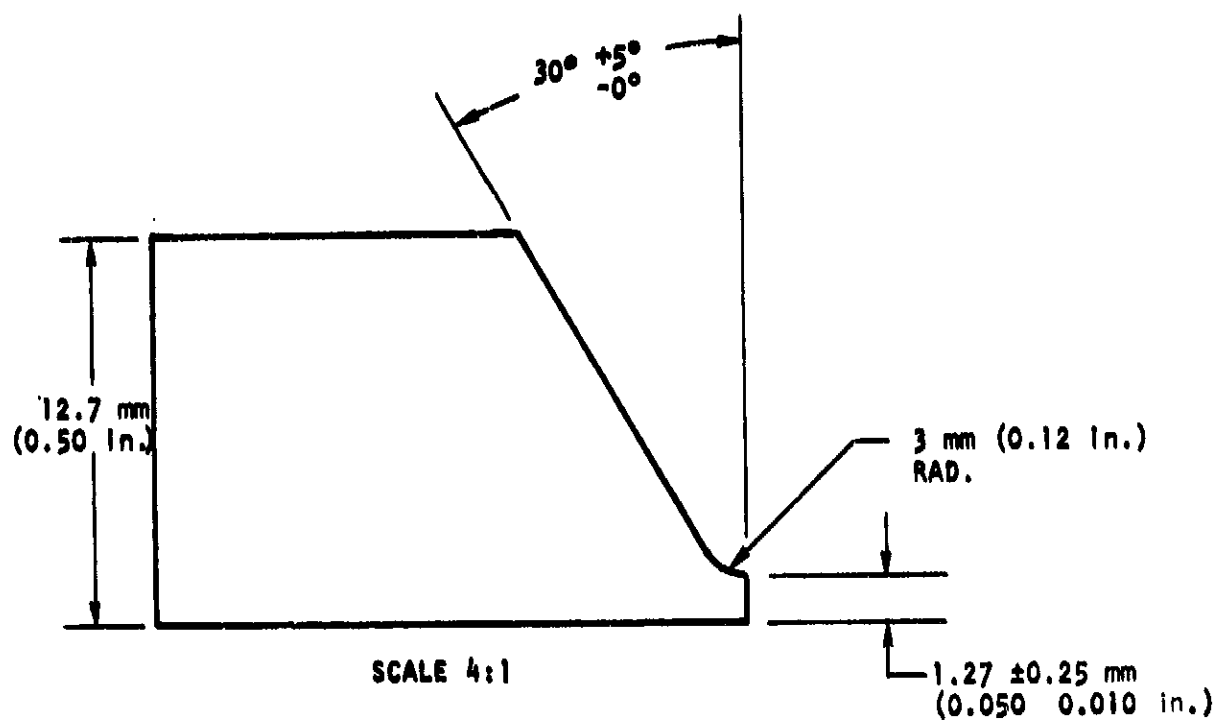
Weld Design for Gas Tungsten Arc Welding of Inconel 718
